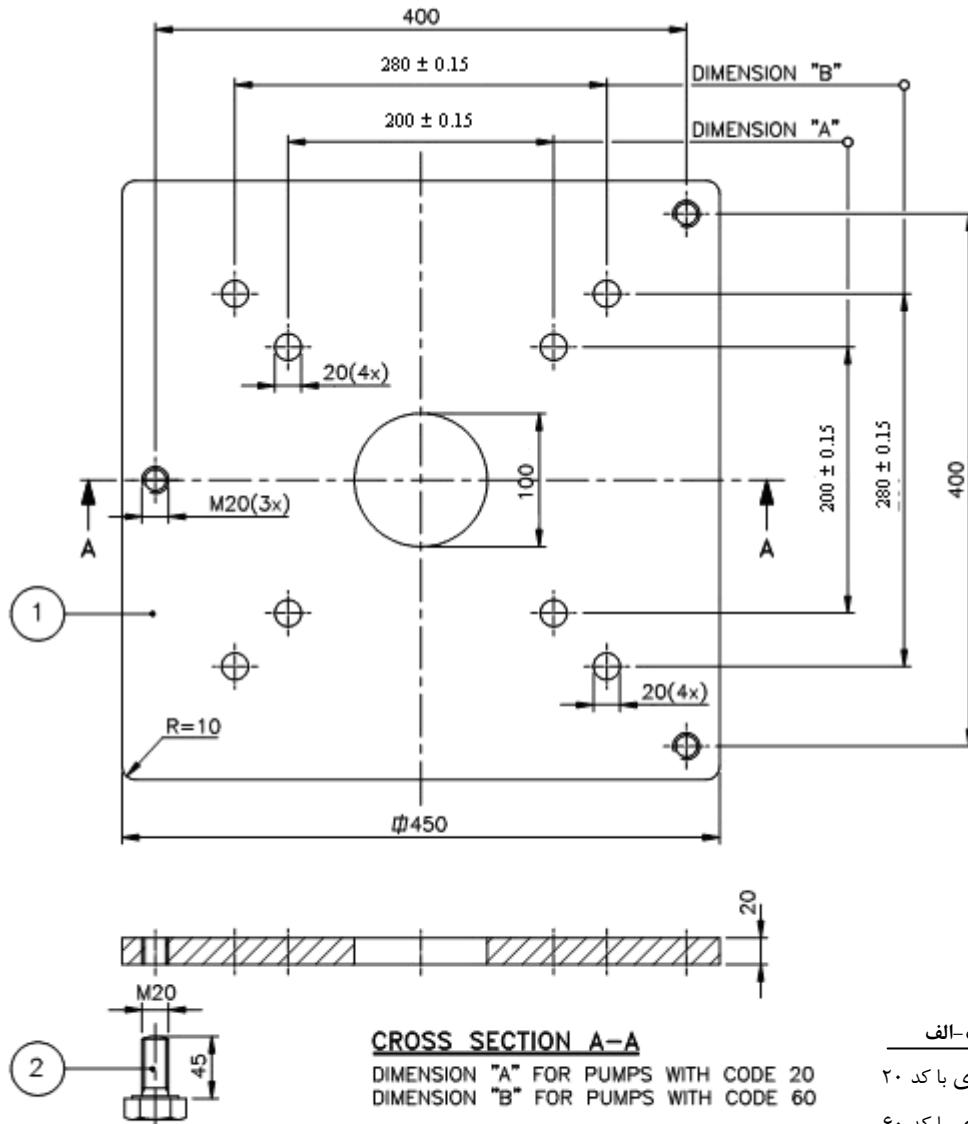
TYPICAL FOUNDATION DIMENSIONS FOR THE INSTALLATION OF VERTICAL CLOSE COUPLED PUMPS (ADD)
